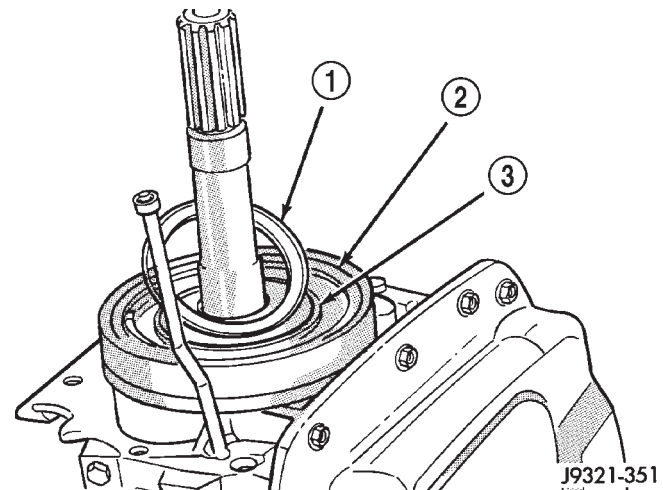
Overdrive Piston Thrust Bearing Removal/Installation
